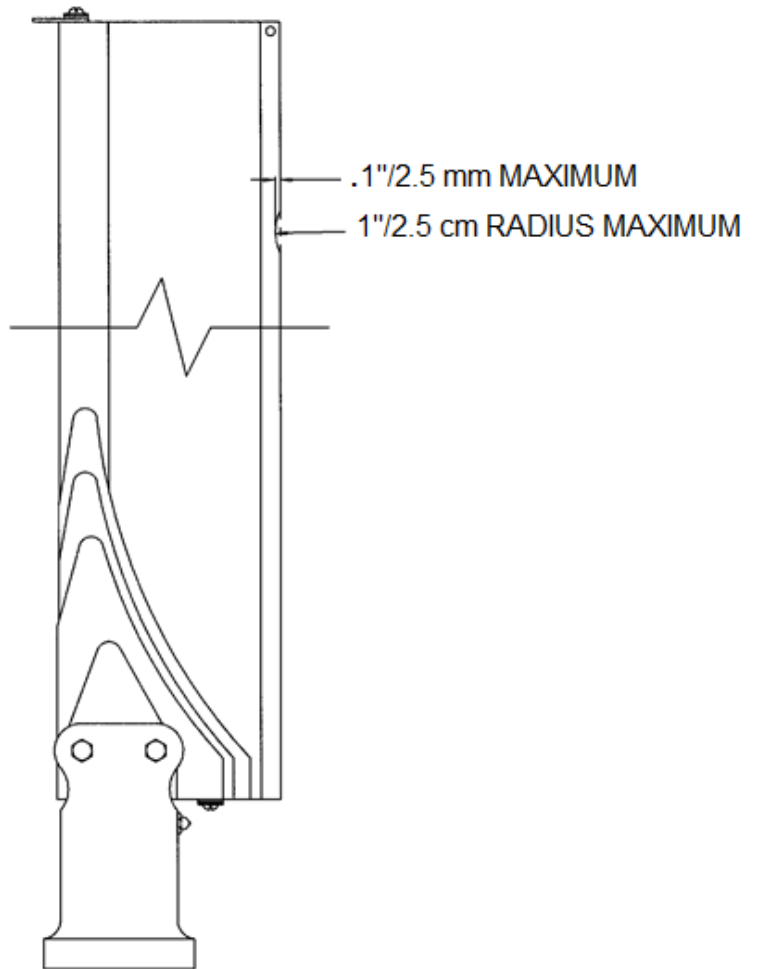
Tail Rotor Blade Trailing Edge Repair Limits
